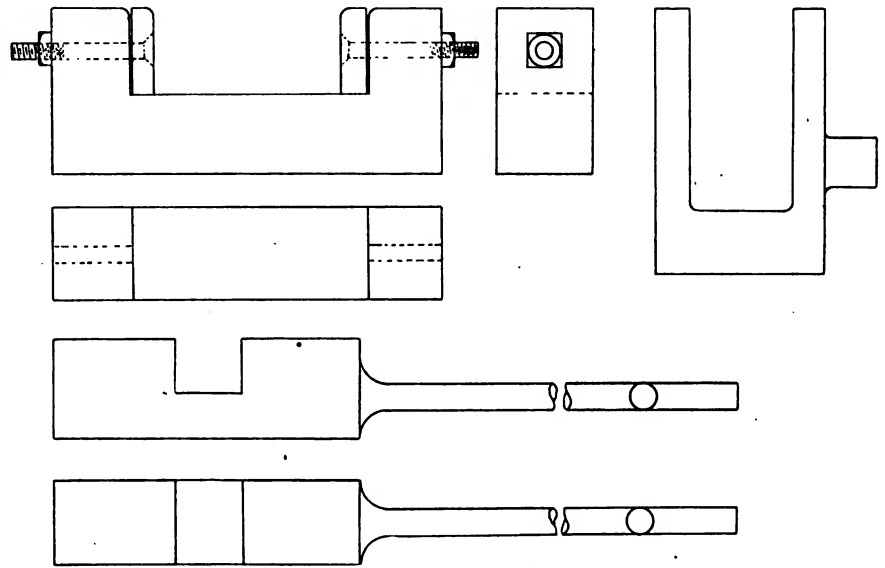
SHOWING A TOOL FOR BENDING ROD STRAPS
